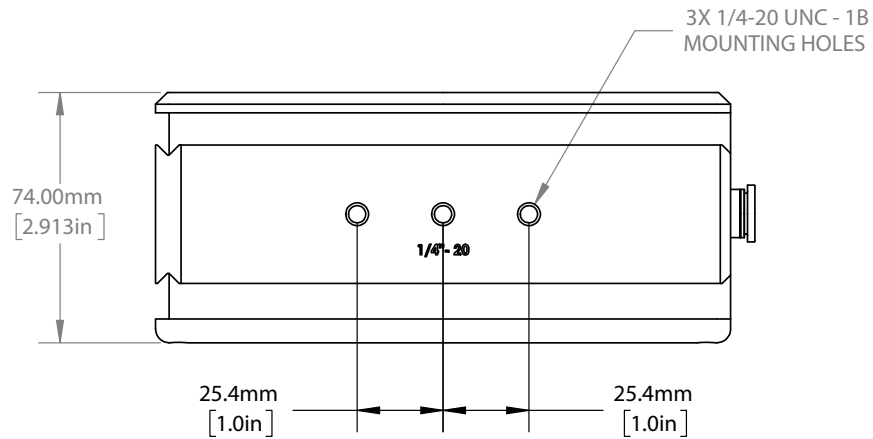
PM15K+ Base Unit Dimensions, Top View
